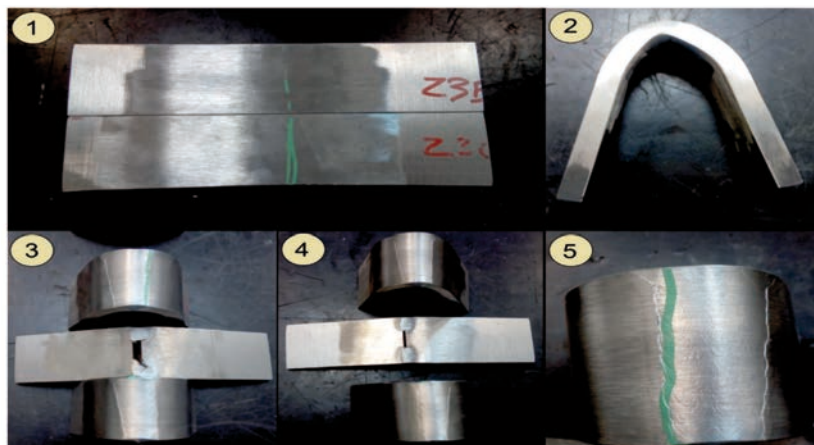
Samples after the transverse bend test. 1) Condition of samples prior to testing; 2) Sample after bending. 3) Test specimens with a visible bend line on the fusion line of the straight wall of the weld groove; 4) Samples after the test with visible bend line in the axis of the weld; 5) Sample after magnification examination
